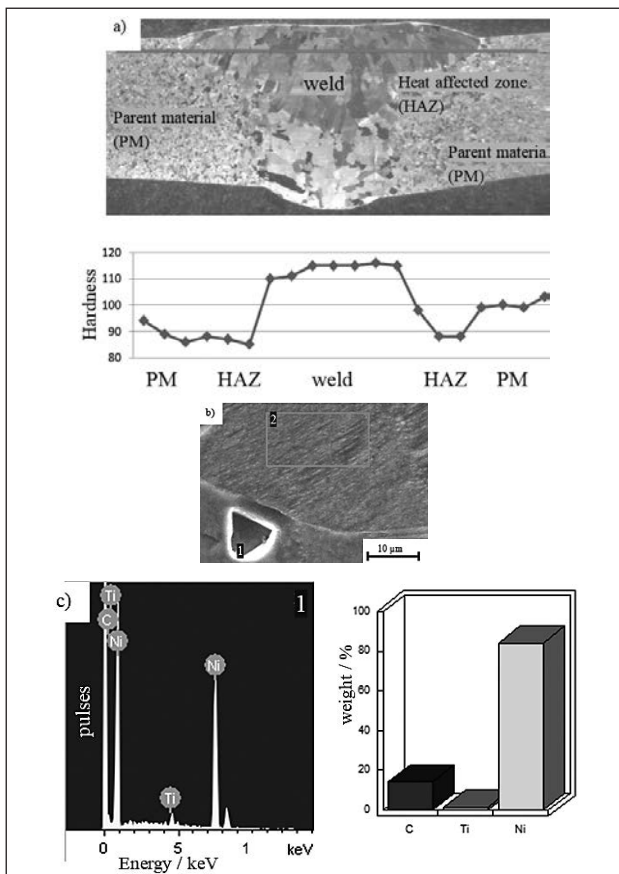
(a) Macrostructure of a welded tee joint on 6 mm thick nickel sheet specimens with marked line along which HV5 hardness; (b) microstructure of the joint weld with marked micro-areas in which chemical composition was determined; (c) images of scattered X-radiation together with element content values in micro-areas 1.
